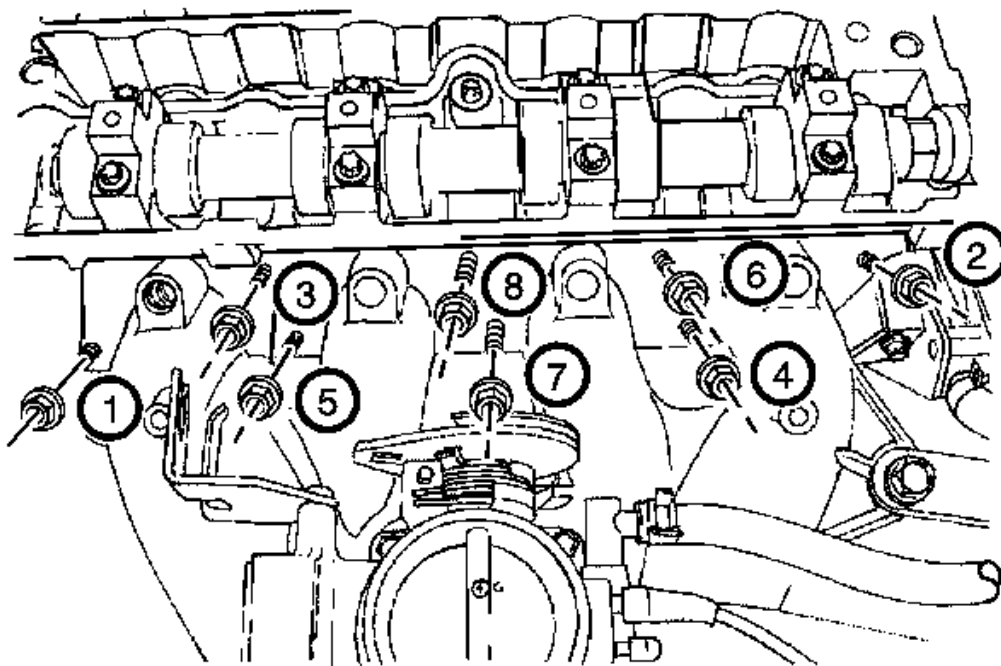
View Of Intake Manifold Retaining Nut Removal Sequence
